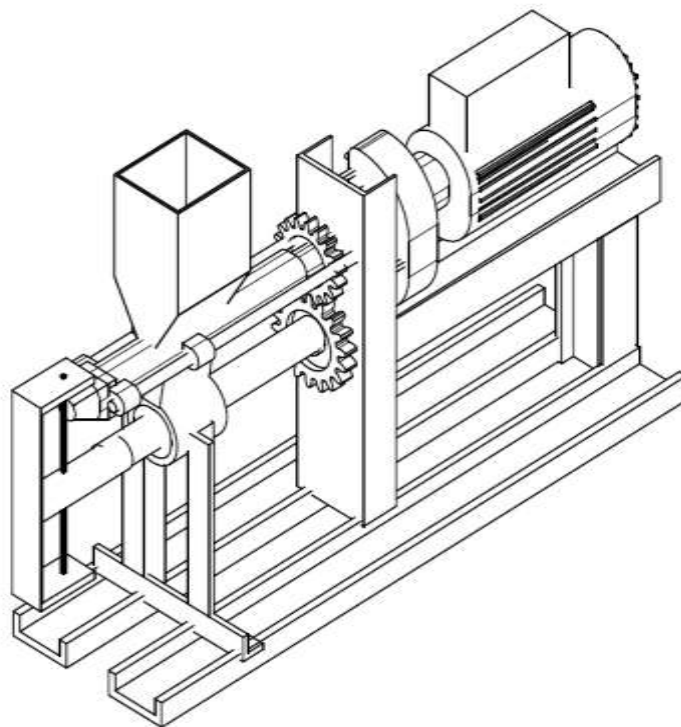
Isometric View of Groundnut Cake Moulding Machine.
